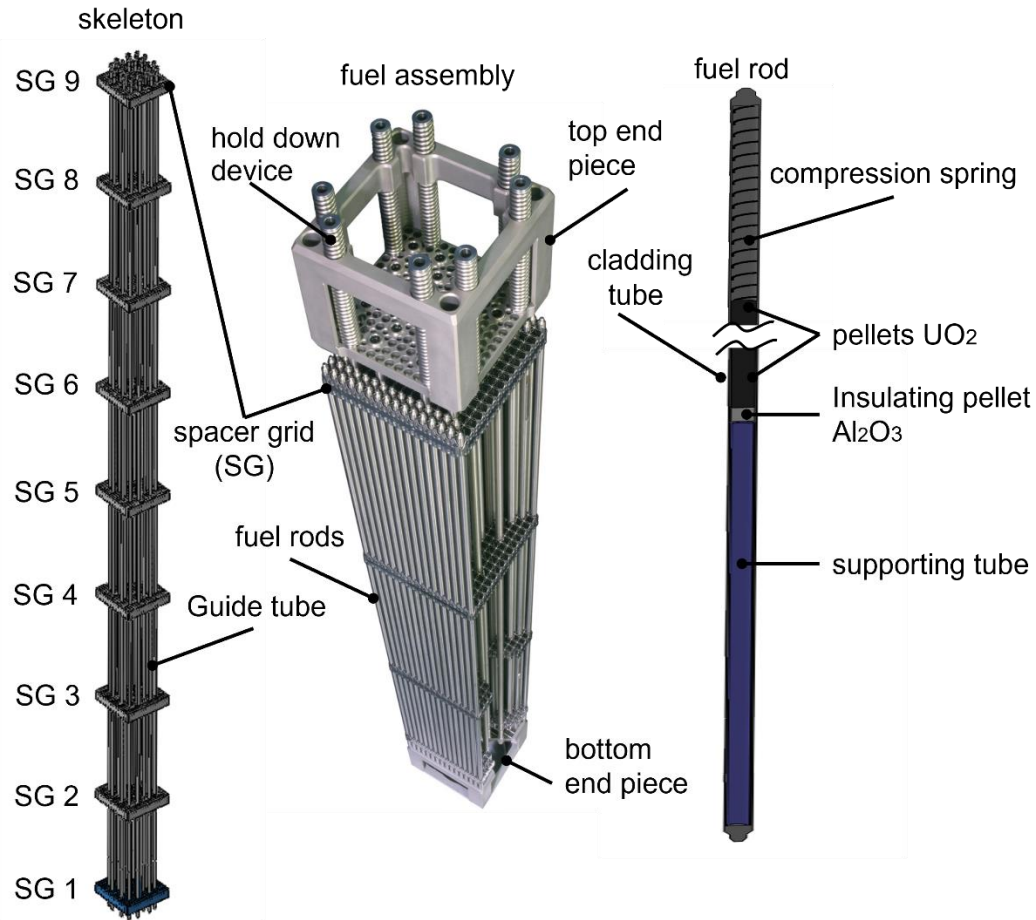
Schematic representation of the FA-structure (skeleton, without top and bottom end piece) and the FR
